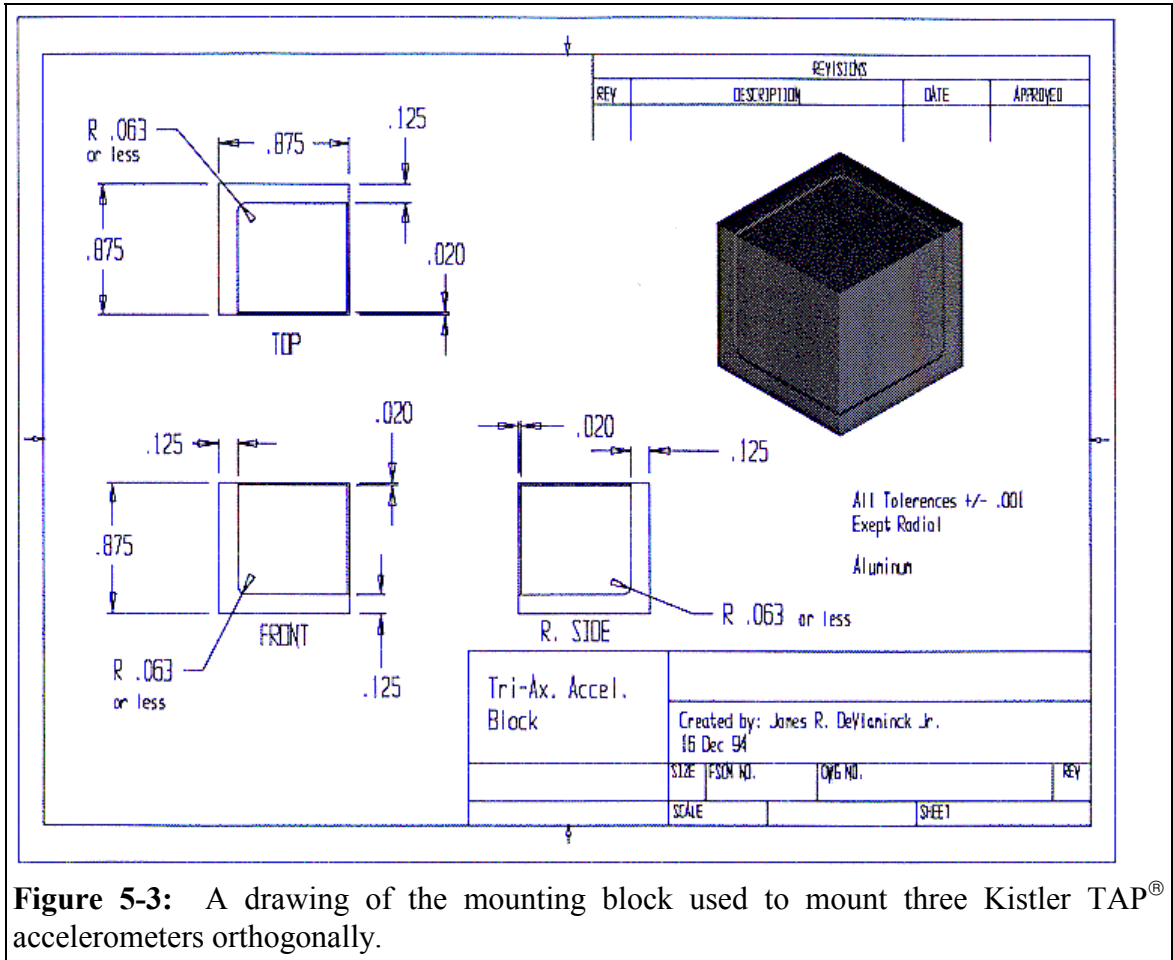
A drawing of the mounting block used to mount three Kistler TAP[®] accelerometers orthogonally.
